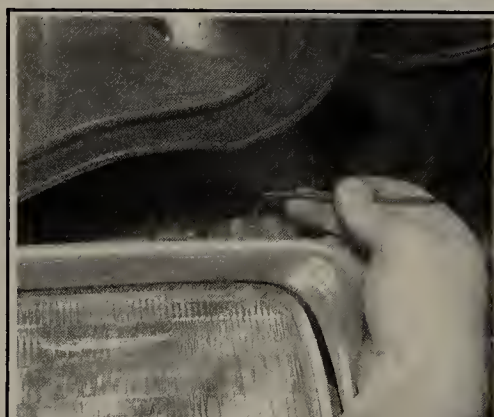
Remove the first of the top bezel/retaining ring screws . . .
